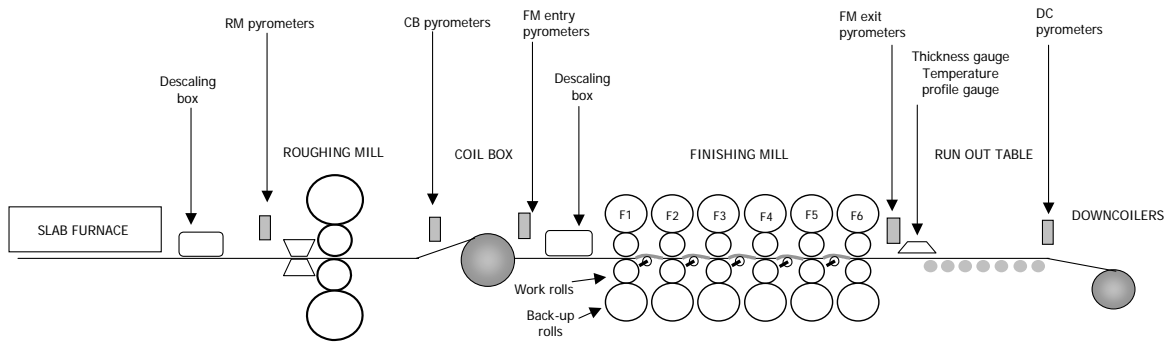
Schematic illustration of the hot strip mill located at the BlueScope Steel Port Kembla works.
